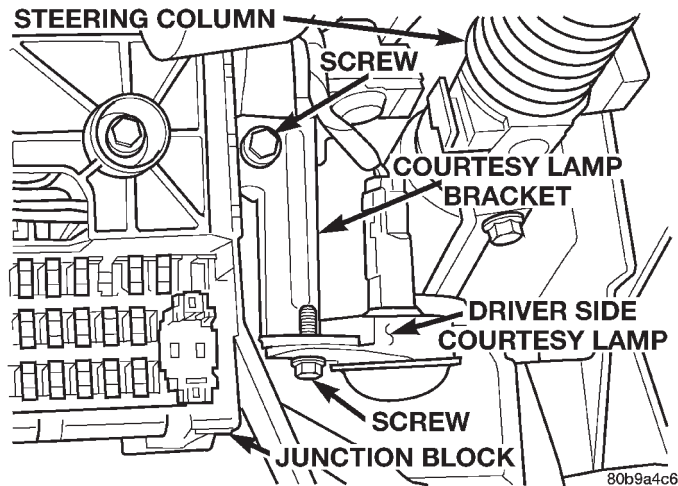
Instrument Panel Driver Side Courtesy Lamp Bracket Remove/Install
